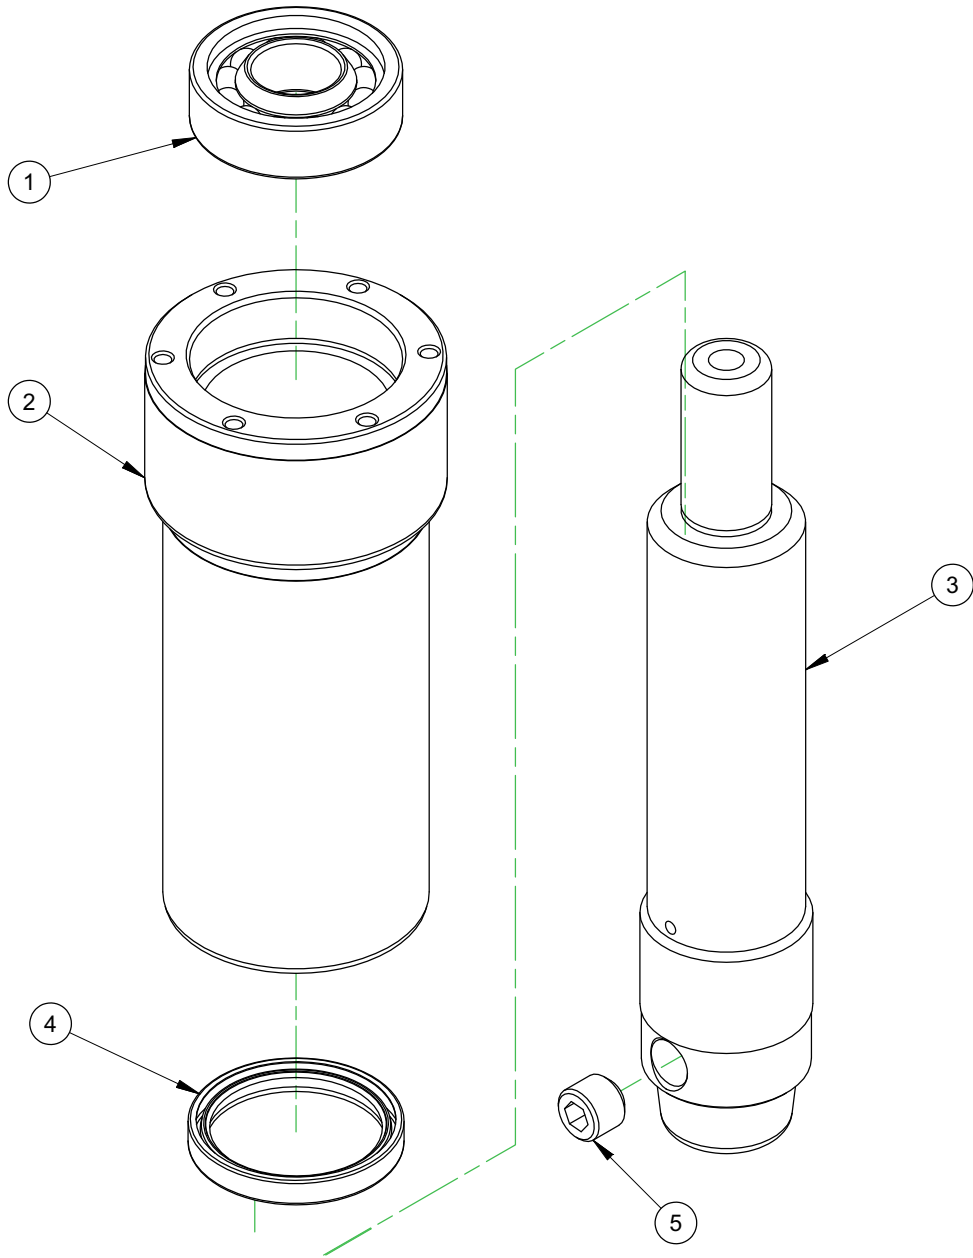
GEARBOX 3.5 RATIO ASSEMBLY (P/N 103341)
